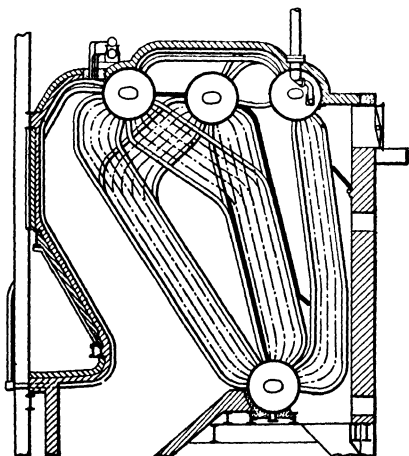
Four-drum bent-tube boiler with alternate tubes of first and second banks crossed. (*Combustion Engineering Company.*)
